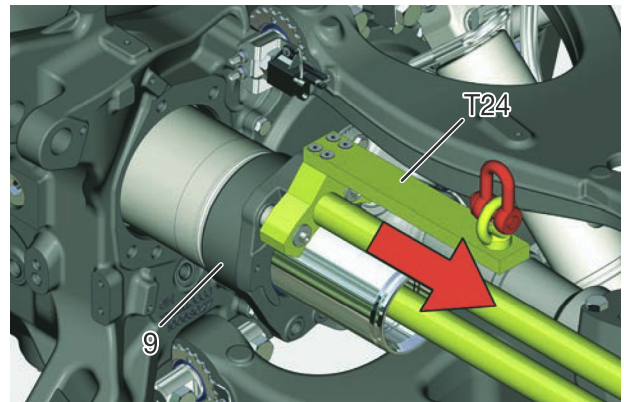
Remove the guide sleeve (9) complete with steering piston.
